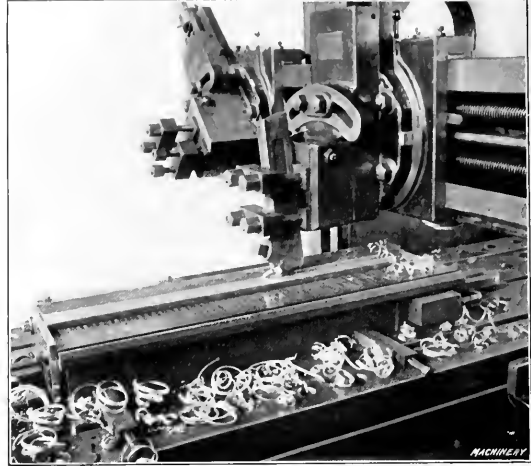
Rectangular or Planer Type of Magnetic Chuck
